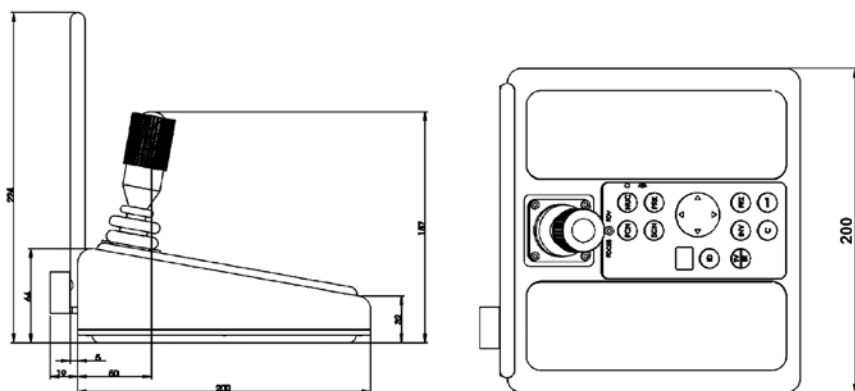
Basic dimensions – Joystick Control Unit (JCU) (Basic dimensions in mm).
